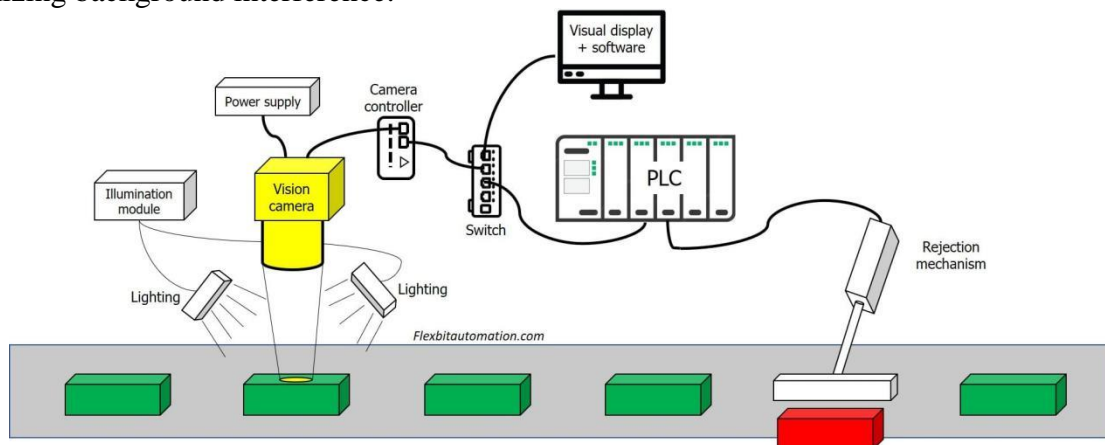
Image acquisition system in assembly line quality inspection
